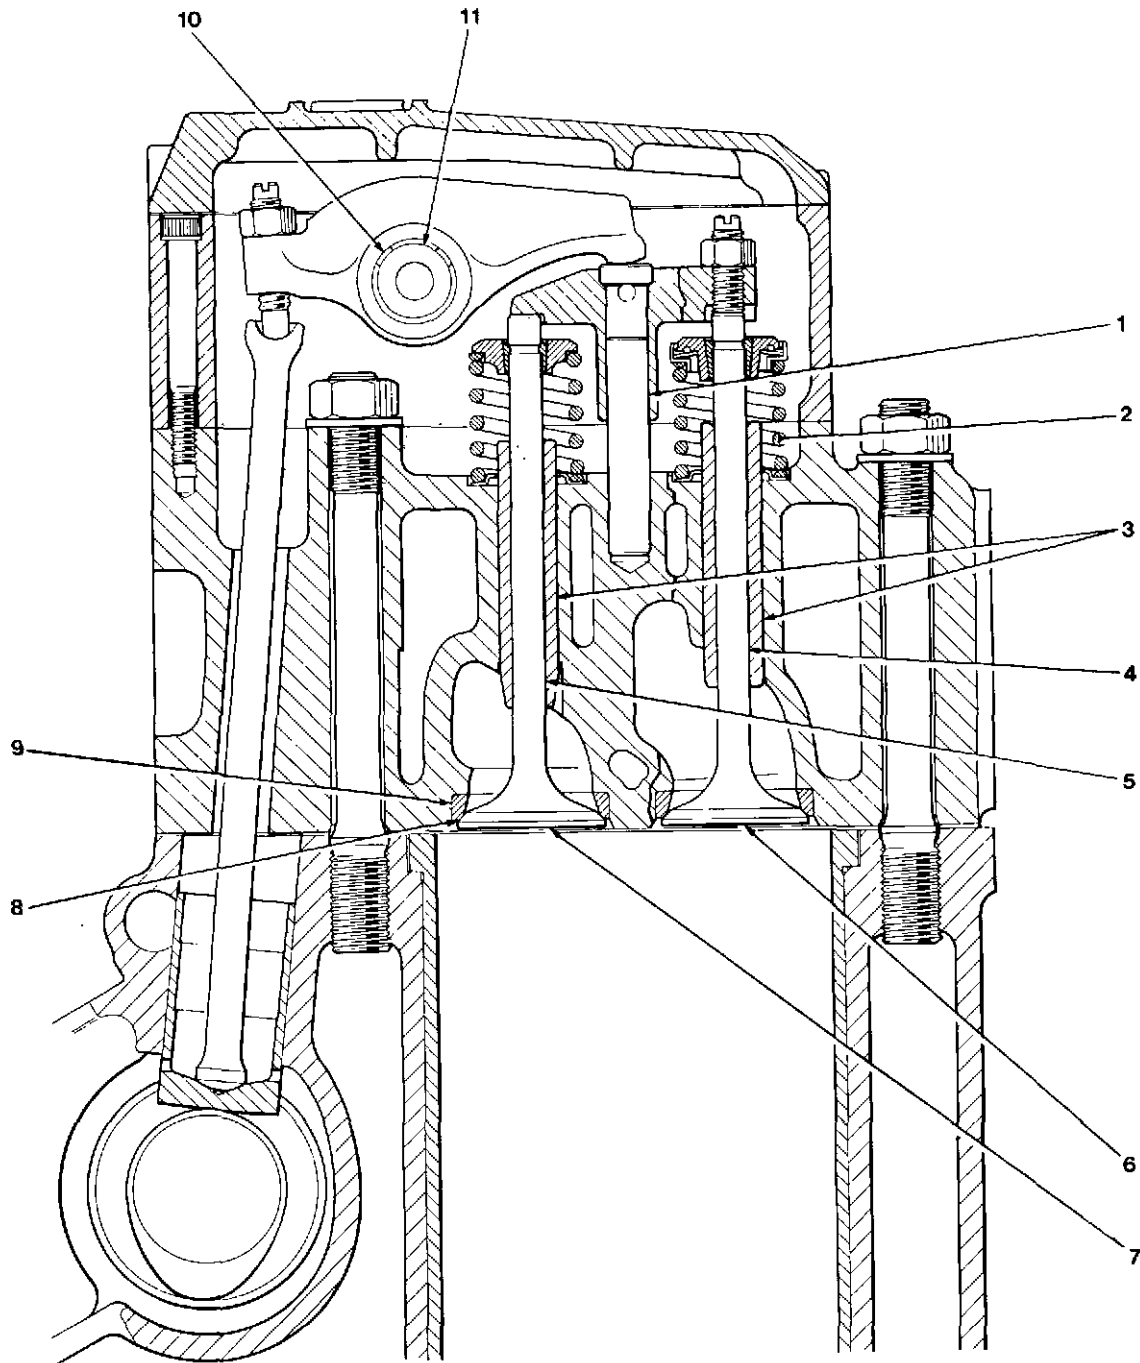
Fits and clearances - Cylinder heads and valve gear
